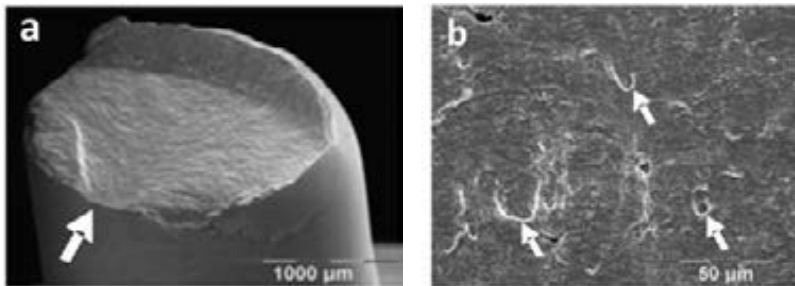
Fracture surface of post-irradiated LCF tests at 450 °C. 6a shows the macroscopic view and the arrow marks the fracture origin. Details of the fracture are presented in Fig. 6b: striation formation with cyclic formed dimples around small inclusions, shown by arrows.
